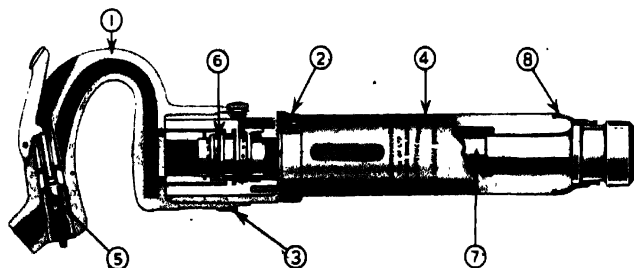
A light C.P.T. pneumatic riveting tool. Key (1), handle, (2), exhaust deflector, (3), locking ring, (4), steel cylinder; (5), throttle valve, (6), cylindrical valve, (7), piston and, (8), snap retainer. (Courtesy of Consolidated Pneumatic Tool Co., Ltd.)
